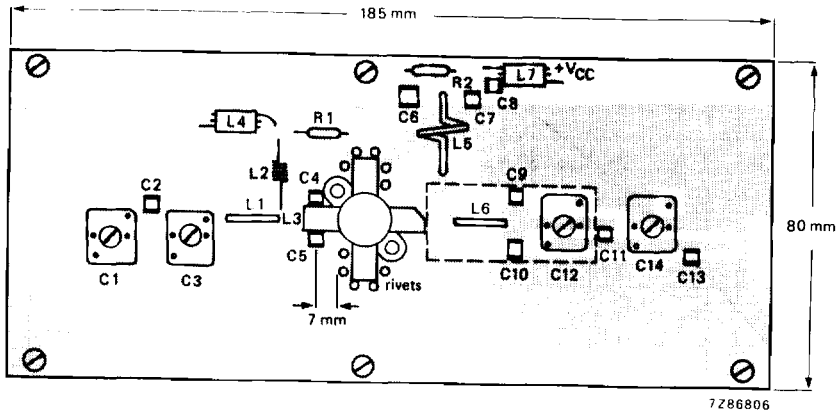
Component layout and printed-circuit board for 175 MHz.
